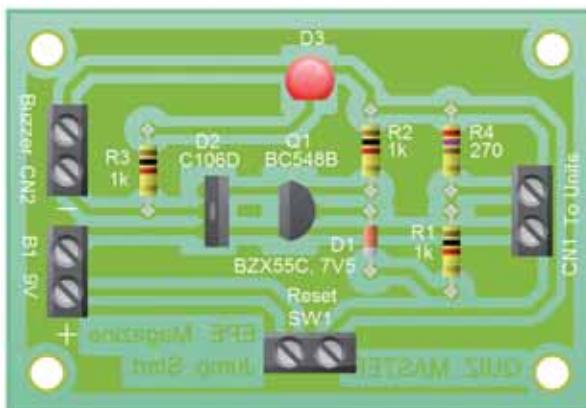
Quiz Machine* master unit printed circuit board (PCB) component layout and copper track artwork
